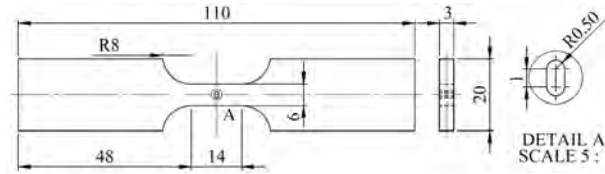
Dimensions, in millimeters, of the OH specimen
